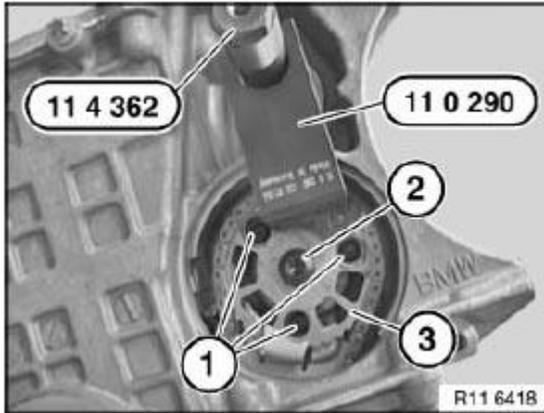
Identifying Special Tool (11 0 290) And (11 4 362)
